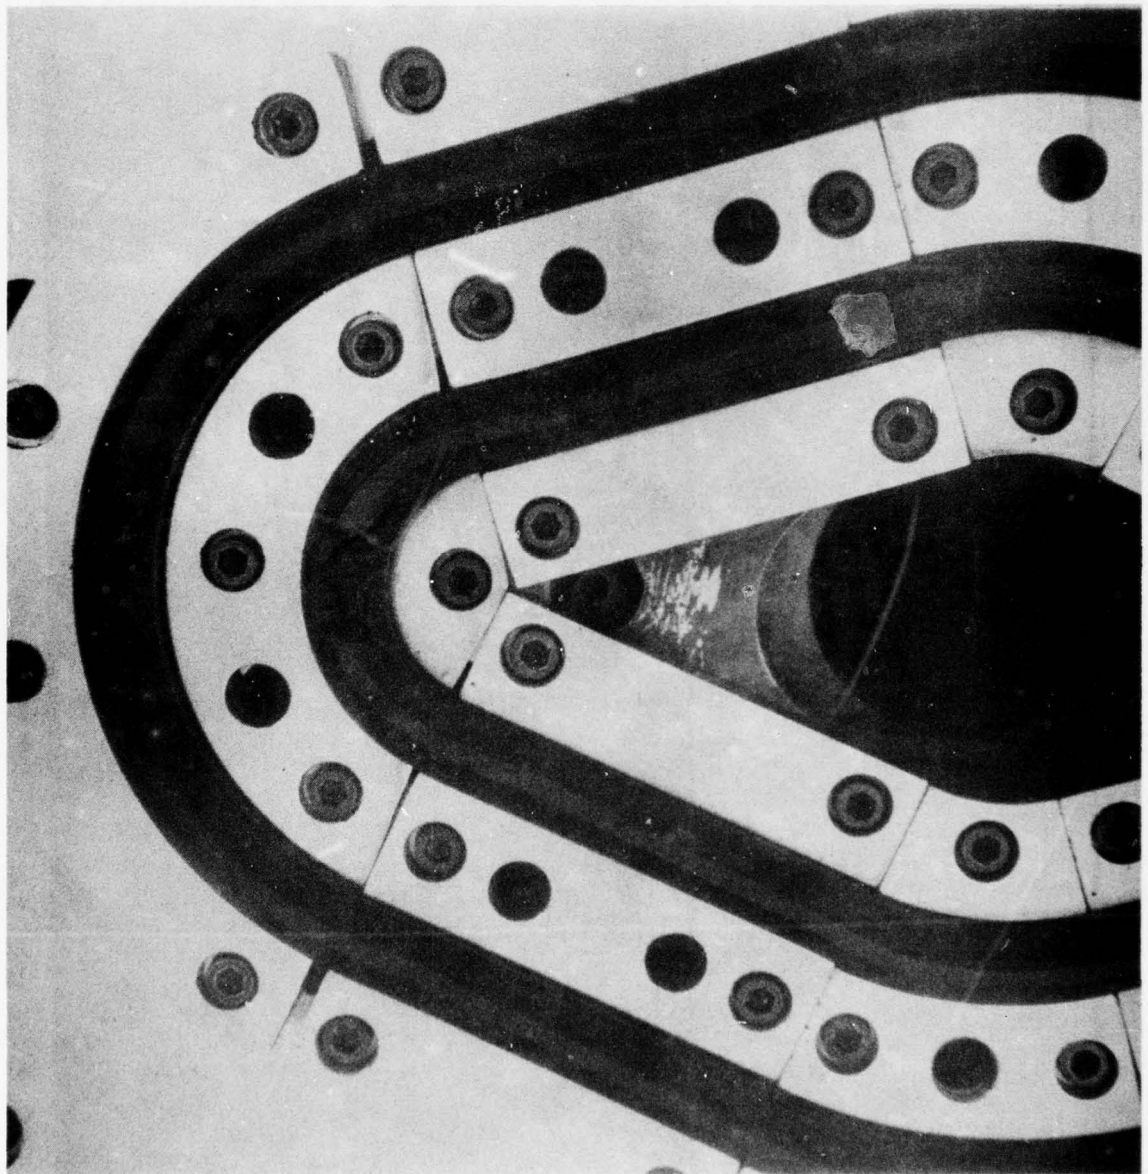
Large Tears in Sliding Seals after Welding Titanium Plate
